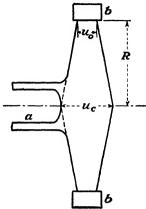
Section of gasturbine rotor: (a) hollow axle, (b) blading.
